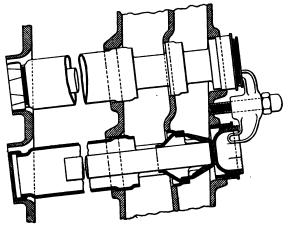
Details of attachment of tubes to header of Niclausse boiler.
